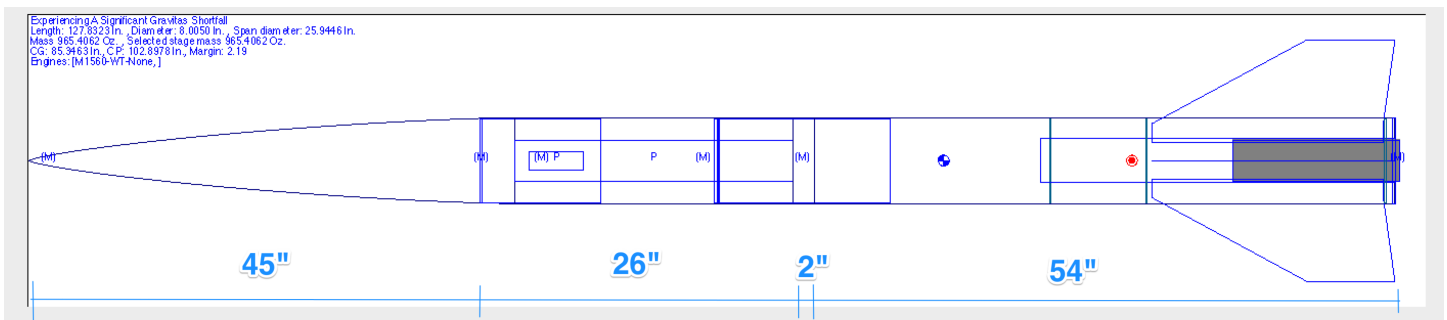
Scale drawing showing the CTI M1560 motor installed.
